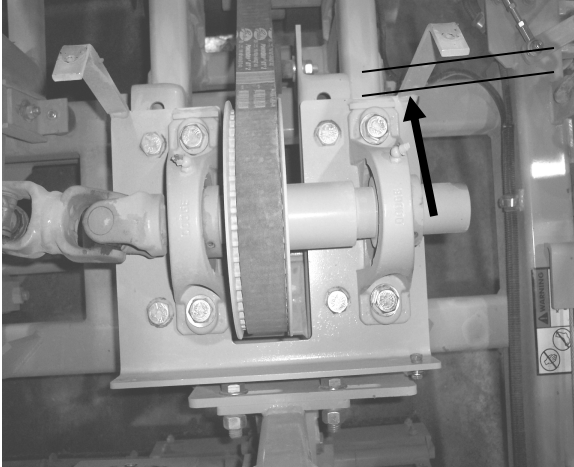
Distance Shown Should Be 1-1/2 (38.1 mm)
